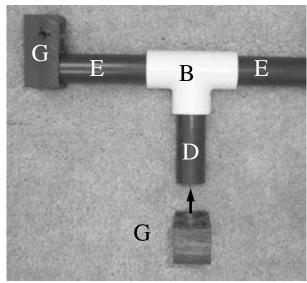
Assembly of the Small Wheelchair (Step 6).
